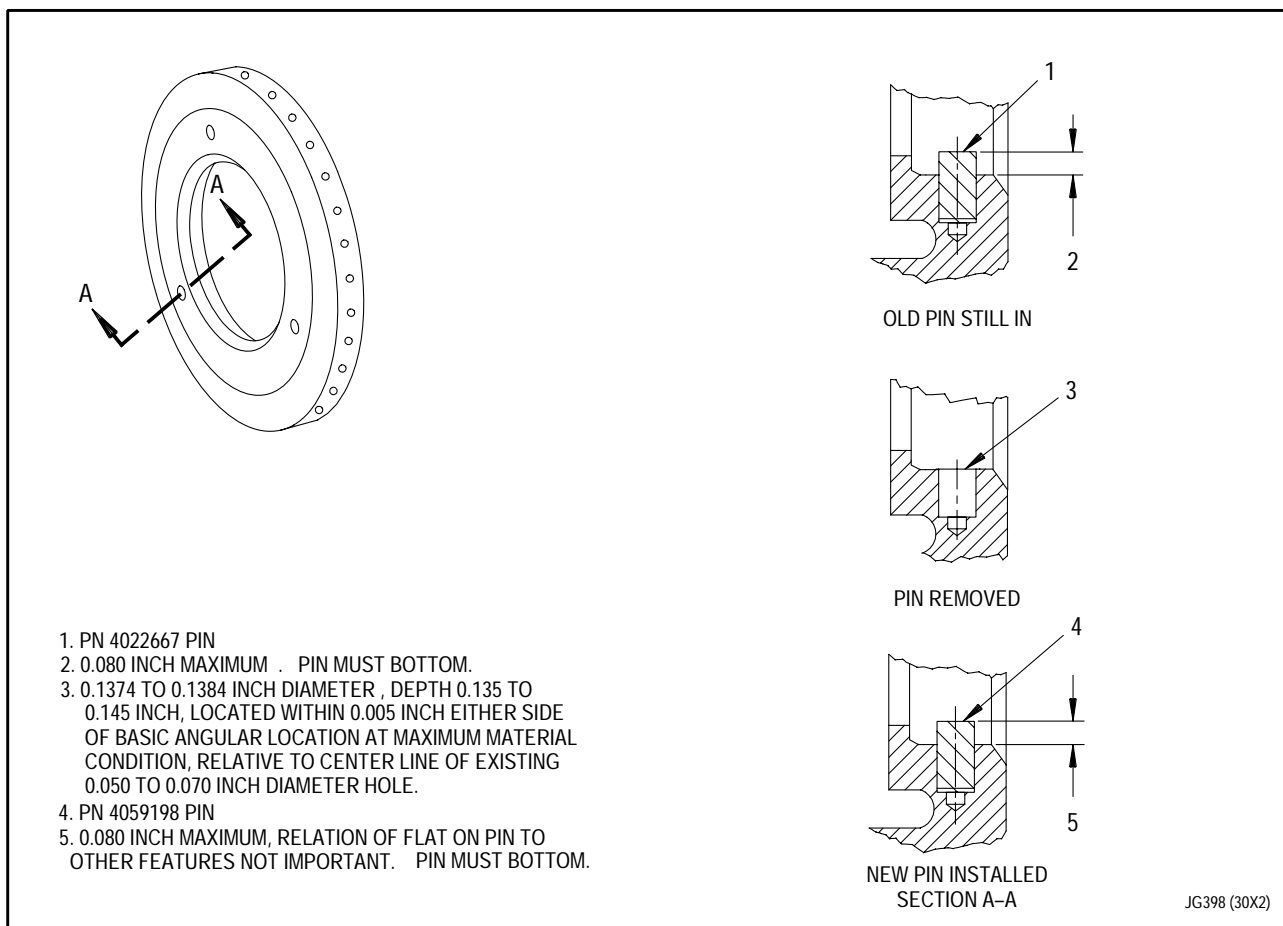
No. 3 Bearing Rear Seal Seat Assembly - Dowel Pin Hole Repair
